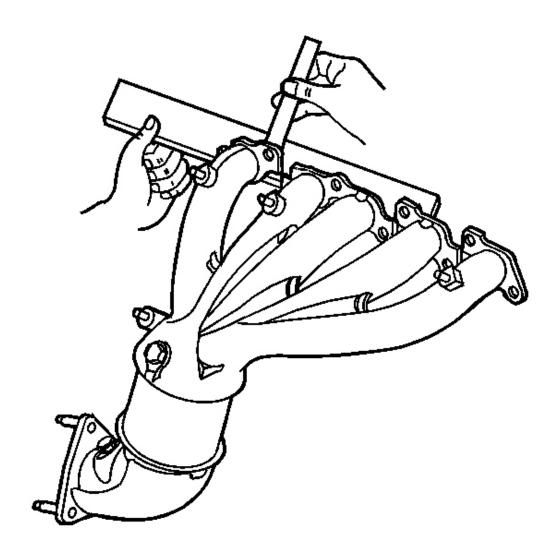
Checking Exhaust Manifold Mating Surface For Flatness Courtesy of GENERAL MOTORS CORP.
